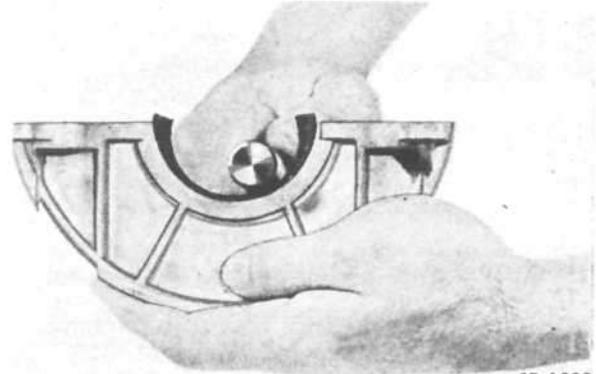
INSTALLING OIL SEAL IN CRANKSHAFT REAR FILLER BLOCK
